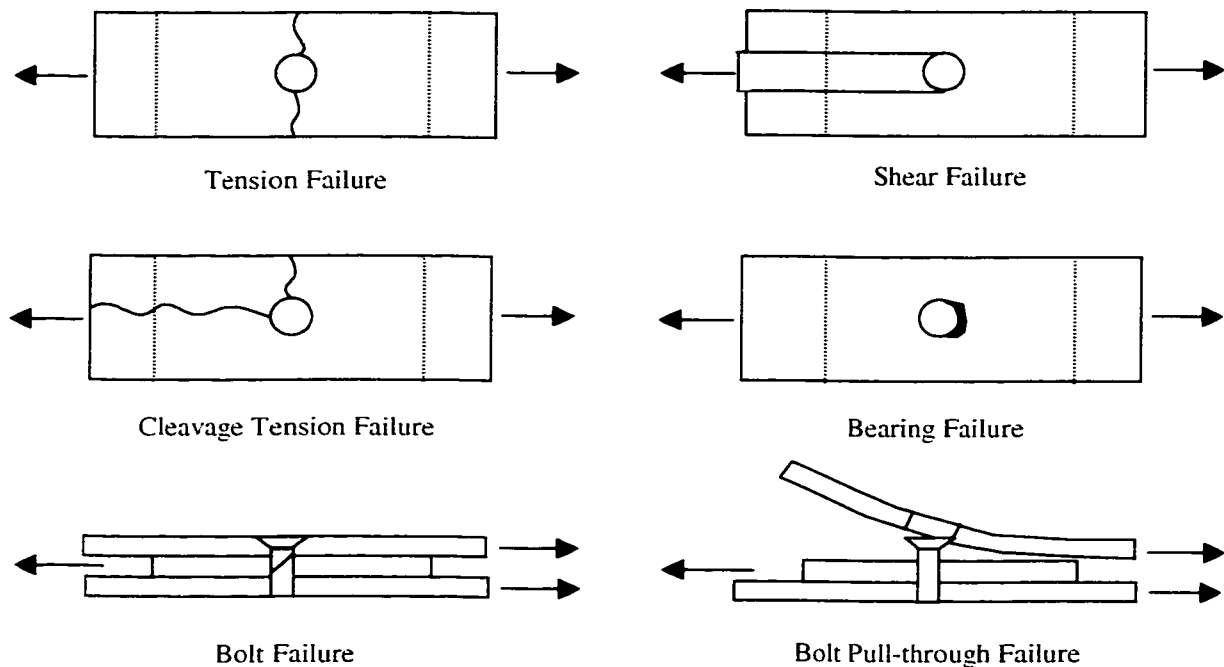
Failure Modes for Bolted Joints in Advanced Composites.⁹
